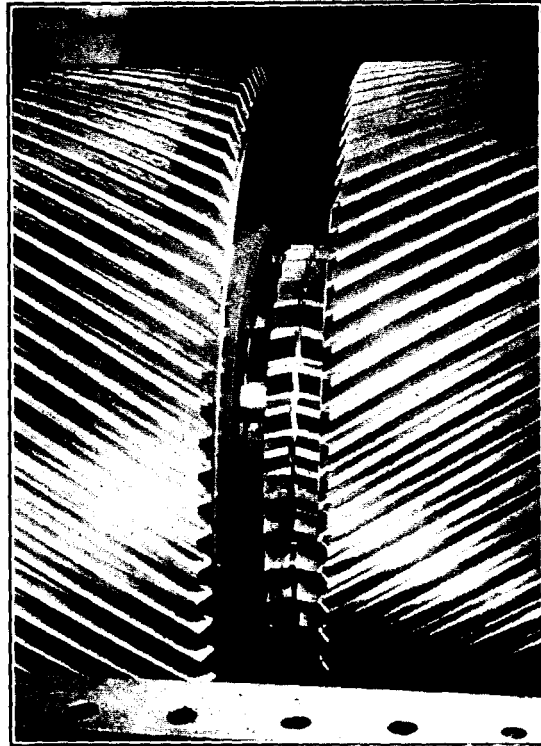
TOOTHED ENGAGEMENT RINGS OF SELF-SYNCHRONISING CLUTCH
